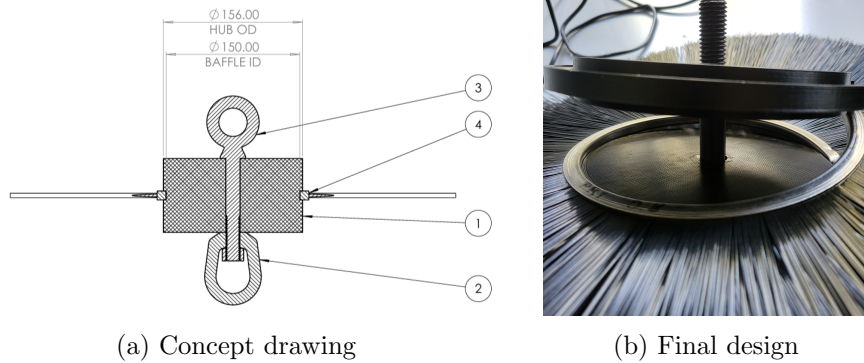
a) The concept drawing of the baffle holding structure. 1) The holding structure, in the final design it is made out of two symmetrical parts. 2) The steel eye nut and 3) the steel eye bolt. 4) The baffle. b) The final design seen in the image is not screwed together, missing the eye nut. The part seen above is symmetrical and placed also under the baffle. The design is cascadable, allowing to easily stack multiple baffles on top of each other.
